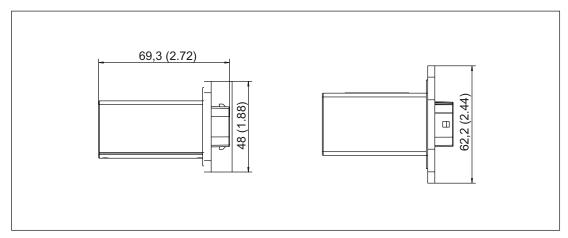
Dimensions of the DRIVE-CLiQ cabinet gland, all dimensions in mm and (inches)
